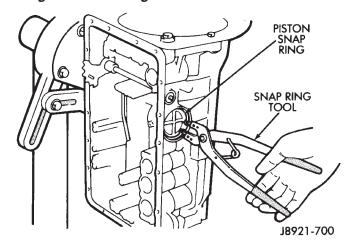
Installing Second Coast Brake Piston Snap Ring
